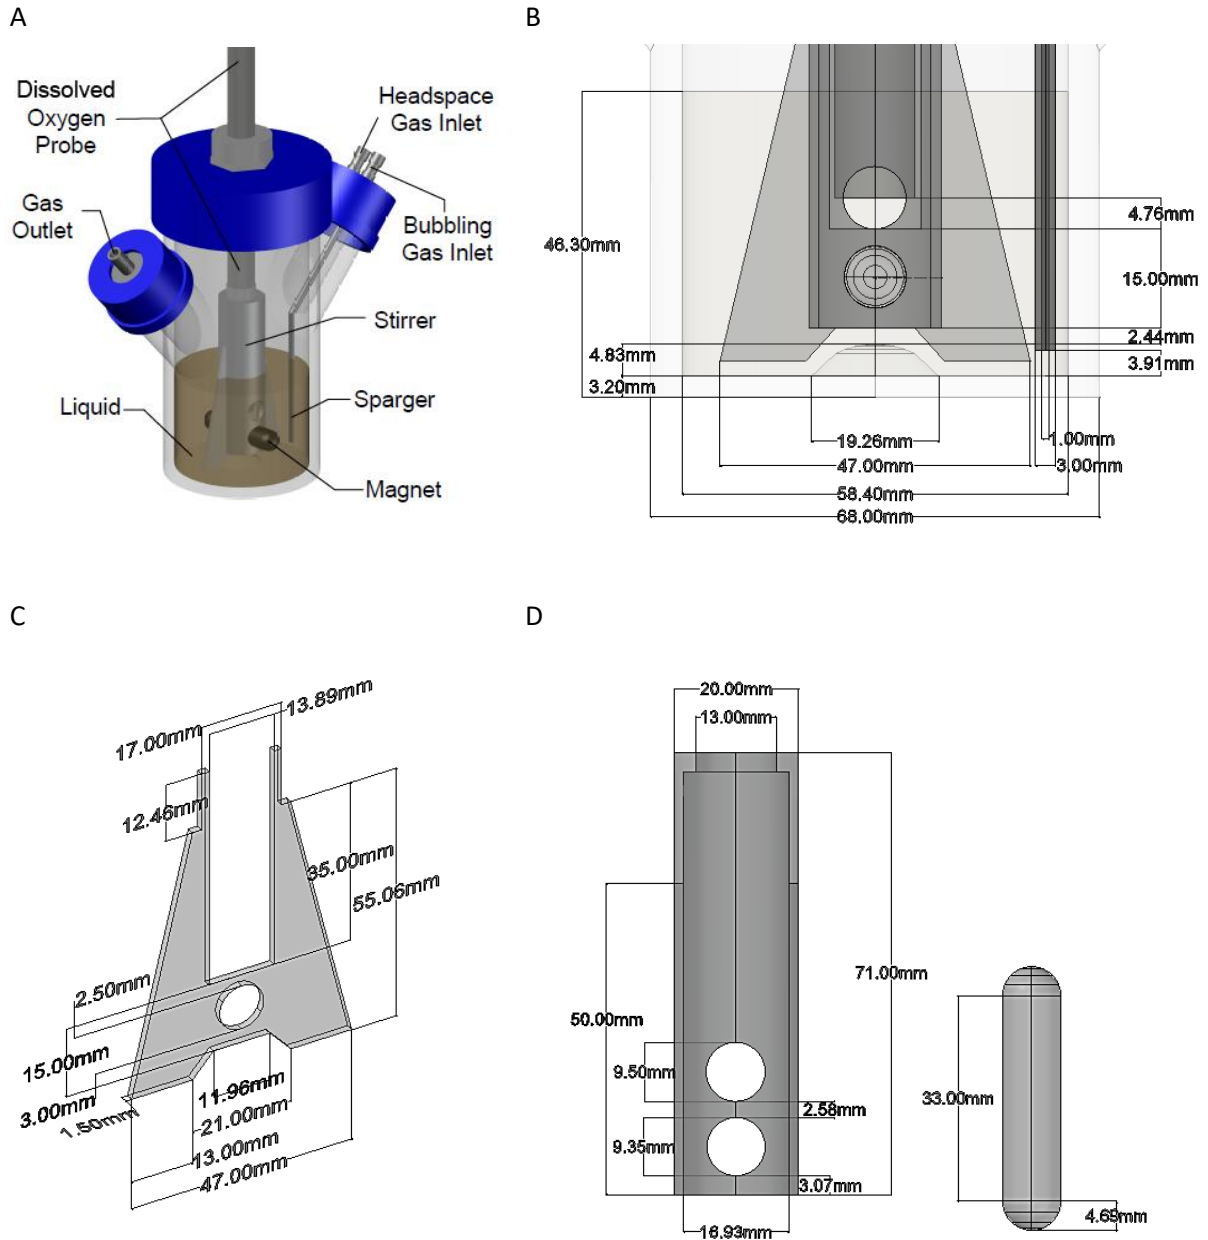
Description of Spinner flasks and impeller geometry: (A) 3D isometric view, (B) bottom geometrical disposition, (C) impeller, and (D) cylinder and magnetic stirrer bar.
